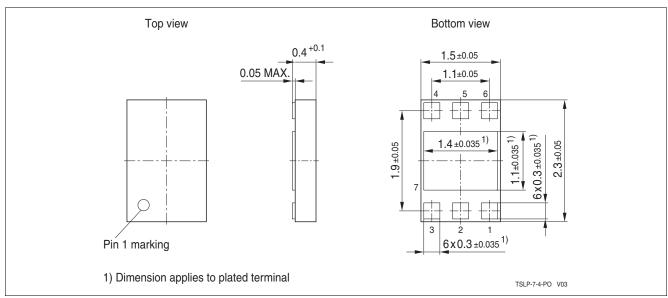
Package Dimensions for TSLP-7-4 (top, side and bottom view)
